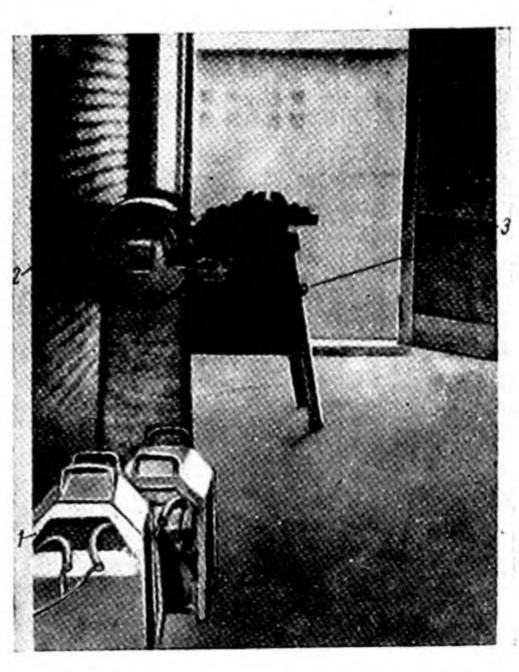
Welding station in a workshop: 1-welding transformer; 2-grind wheel; 3-work bench
